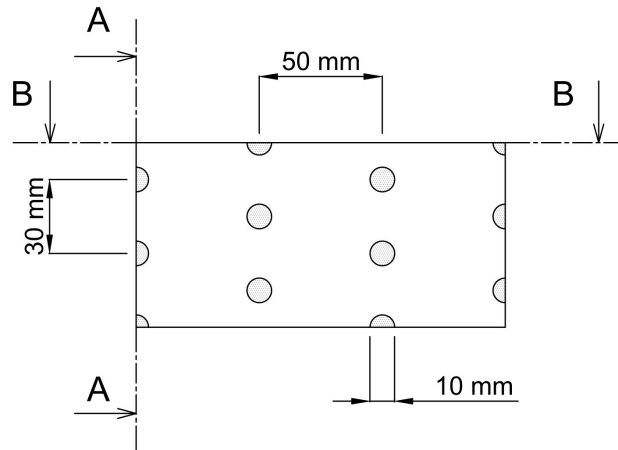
Drawing of the welding pattern of the pillow plates
